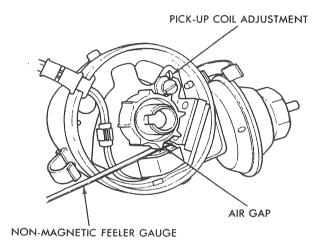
Checking pickup coil air gap. (Courtesy of Chrysler Motors Corp.)
